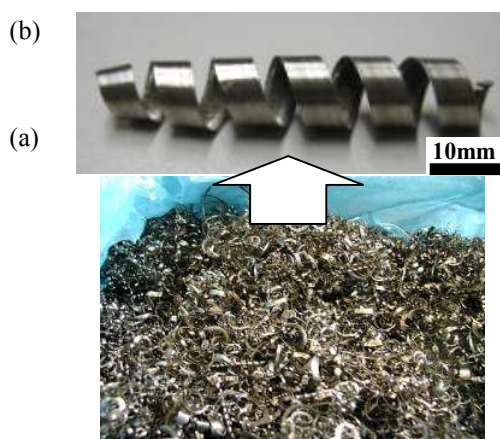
(a) Fe-Mn-Si-Cr SMA machining chips and (b) a chip used in the present experiment.
